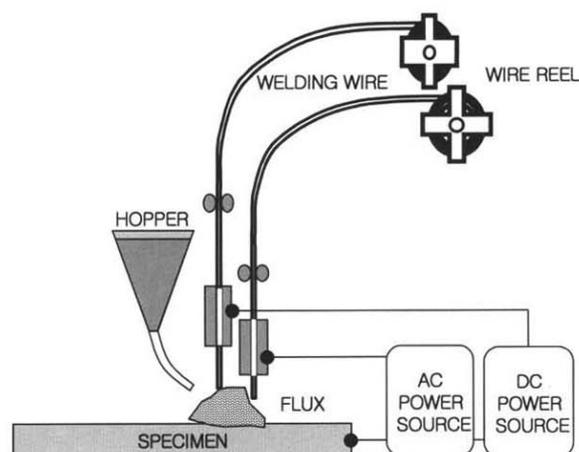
Experimental configuration of submerged arc welding process used in this study.
